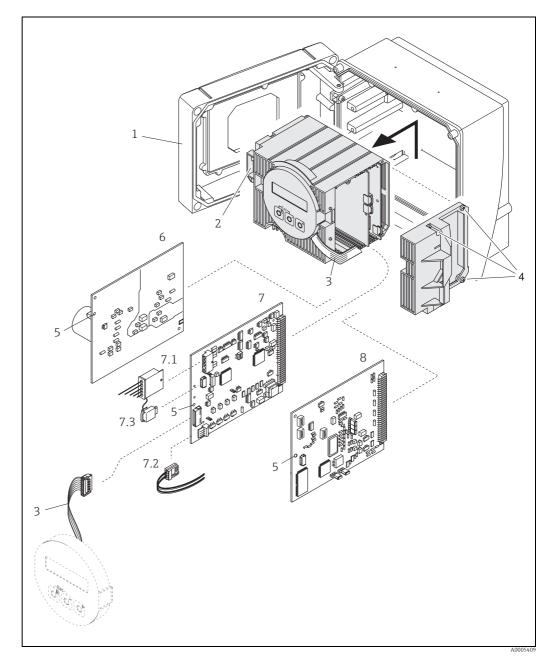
Wall-mount housing: removing and installing printed circuit boards
